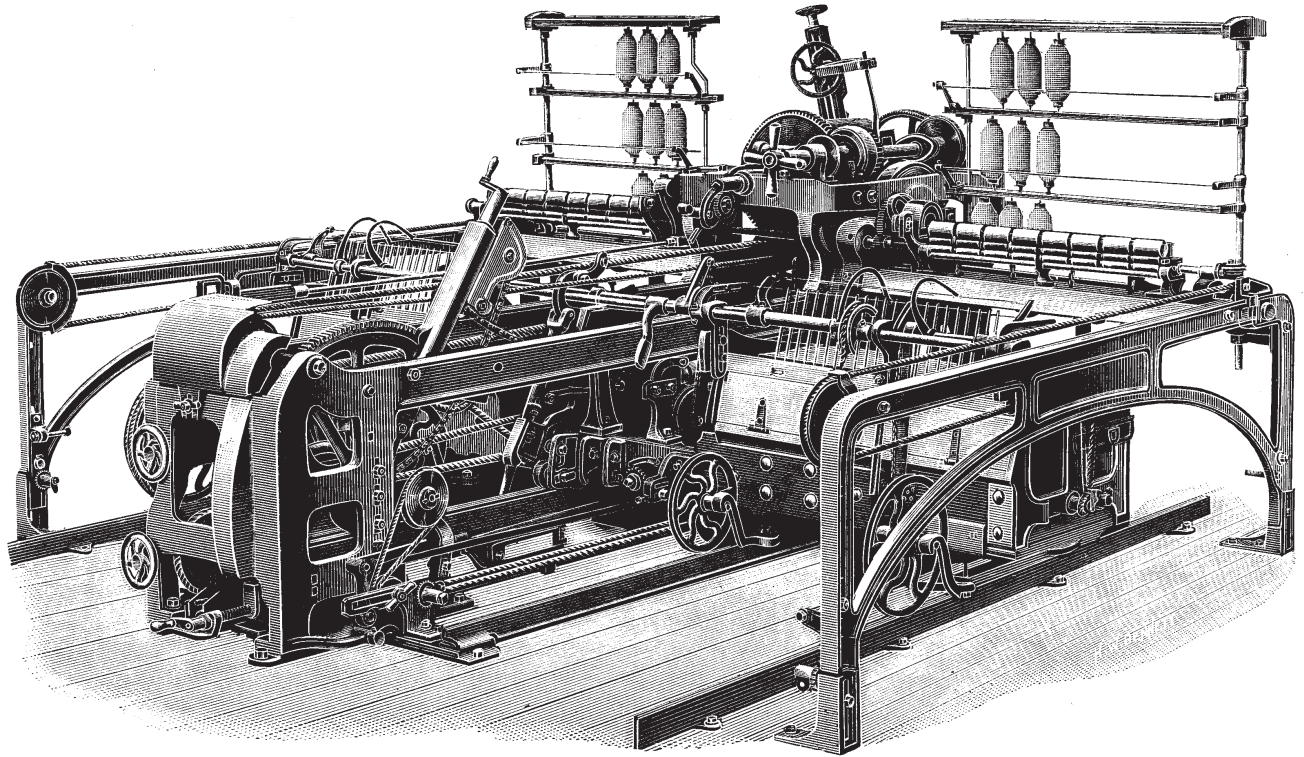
FRONT VIEW OF MULE HEADSTOCK WITH PART OF CARRIAGE.
